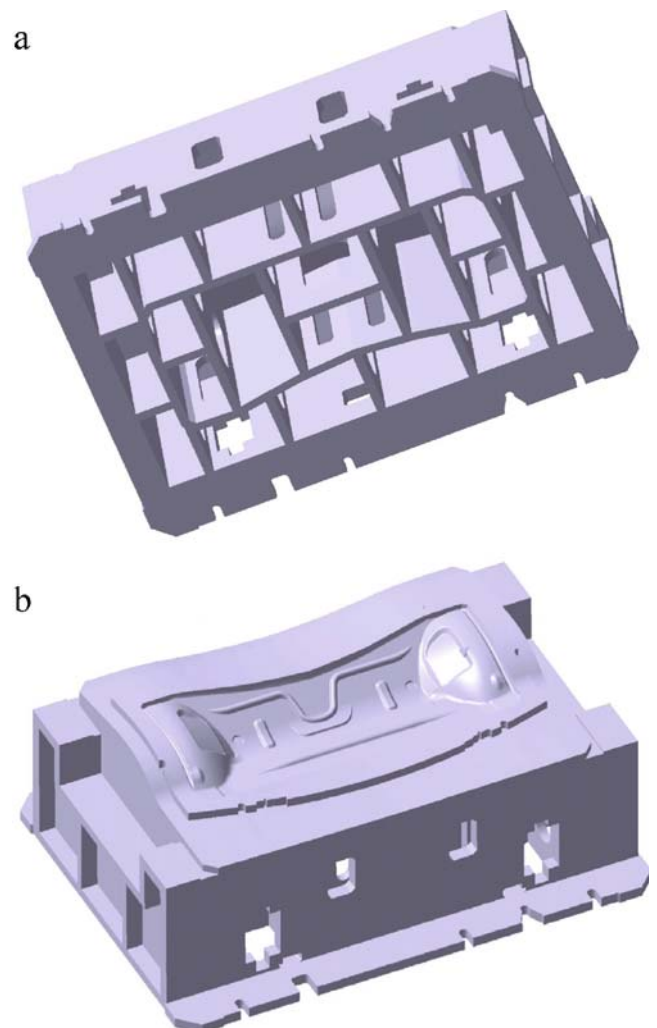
Geometry CAD of die: (a) 3D-down (bottom view), (b) 3D-up (general view). The bottom view shows the cavities and ribs for lightweight die
